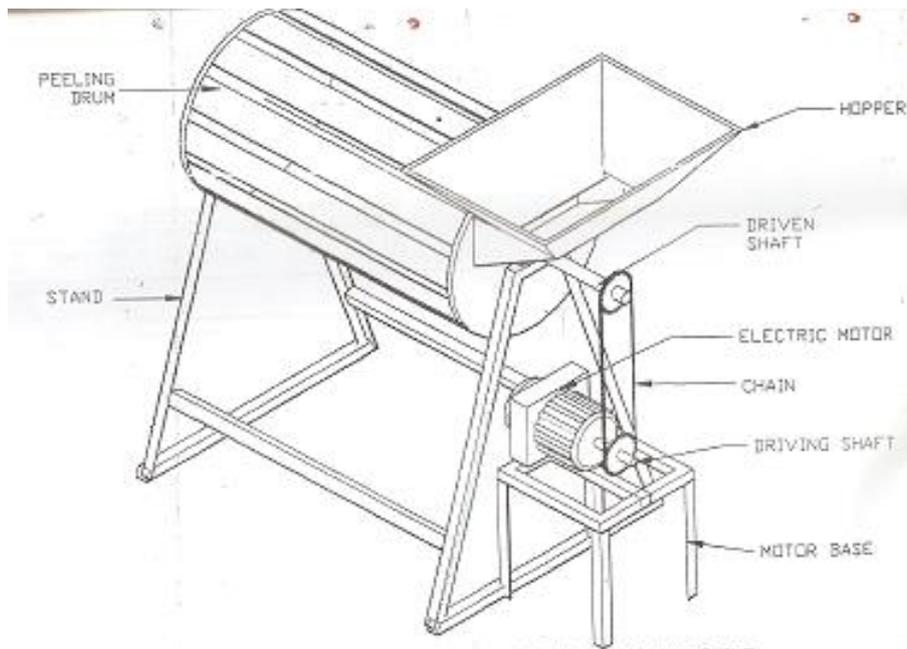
Isometric View of Modified Cassava Peeling Machine
